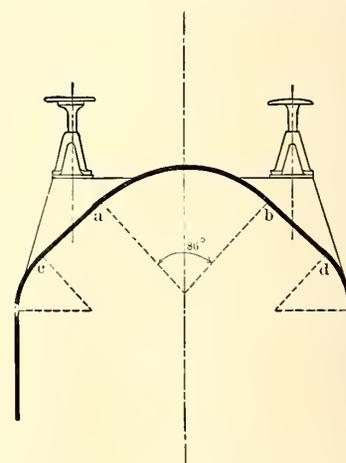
SUGGESTED FORM OF FRONT END OF CAR
